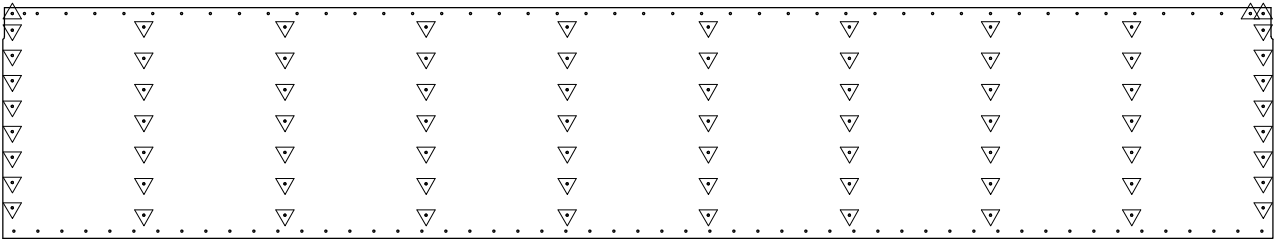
A-1002-1 BOTTOM SKIN RIVETS
